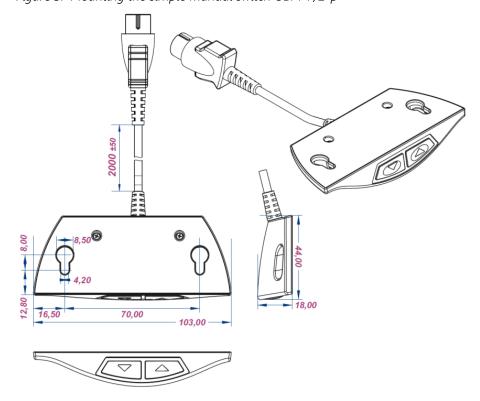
Dimensions of the simple manual switch UBM-F/2-p
